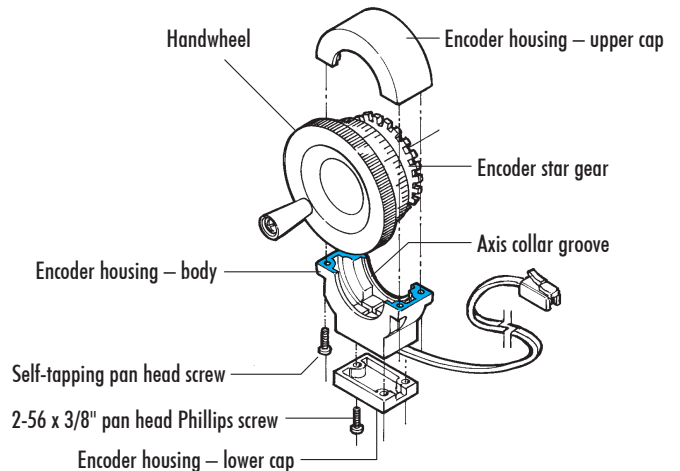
The highlighted areas in light blue show the mating surfaces of the encoder housing. Make sure to check the surfaces on both the housing body and the upper cap.
